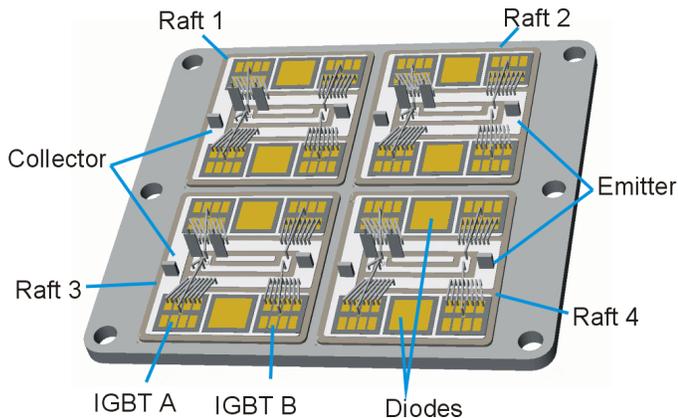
Internal layout of manufacturer “A” IGBT module.
